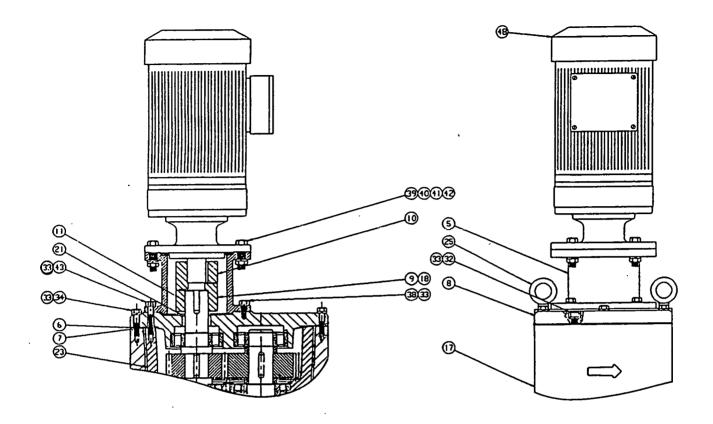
MOTOR, SPOOL, CUTTER CARTRIDGE REPLACEMENT
